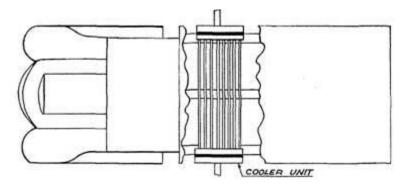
ARRANGEMENT OF COOLER ON MOTOR TRUCK
